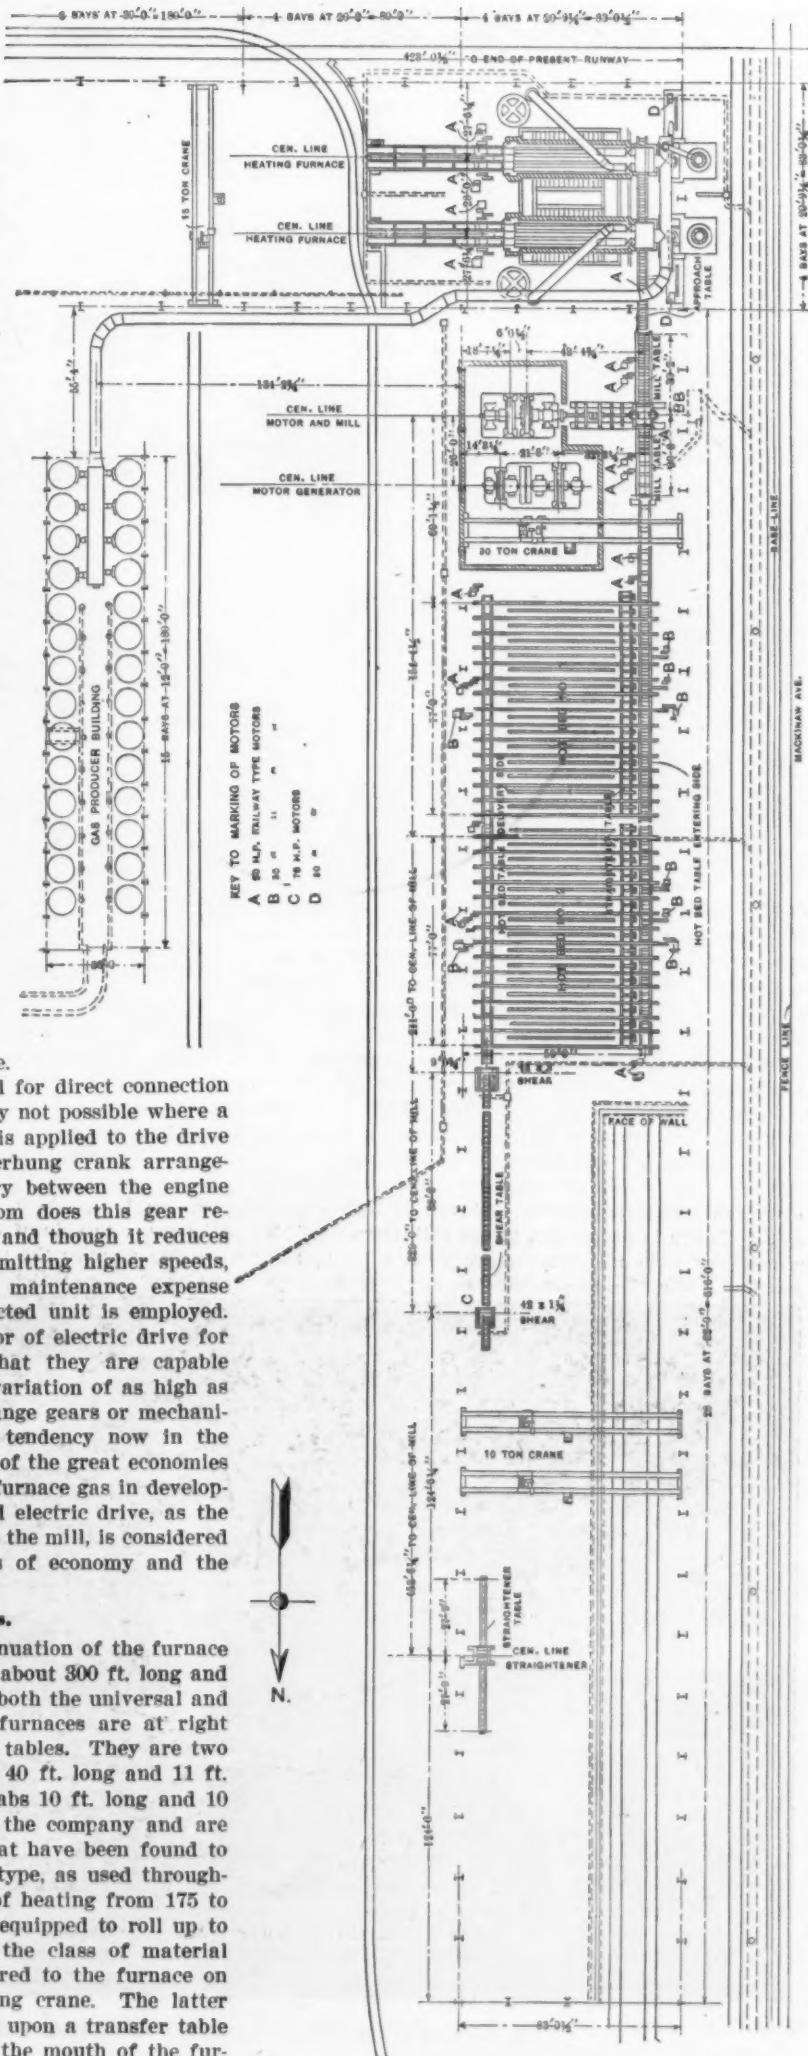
General Plan of the New 30-In. Universal Plate Mill of the Illinois Steel Company.
